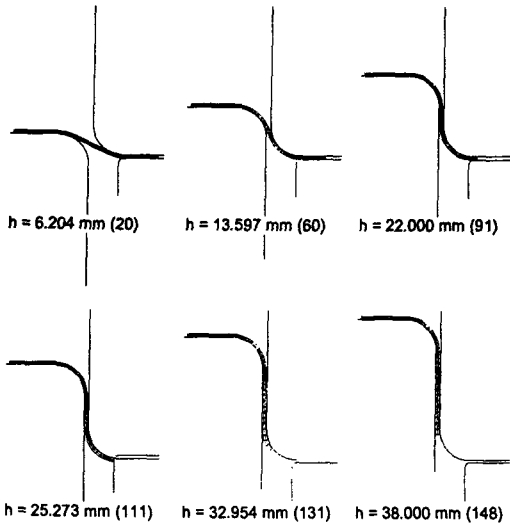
Deformation of blank one-stage deep drawing(h : punch displacement)
